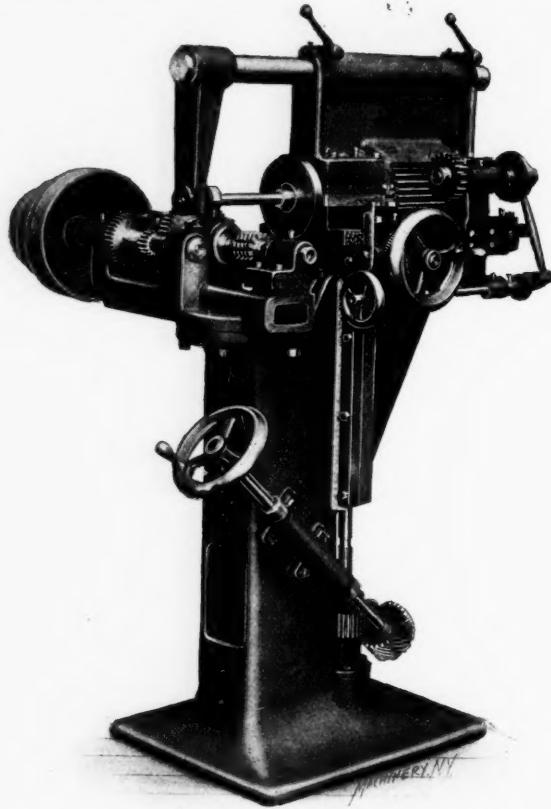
Gear-hobbing Machine for Hobs of Fixed Helix Angle.
